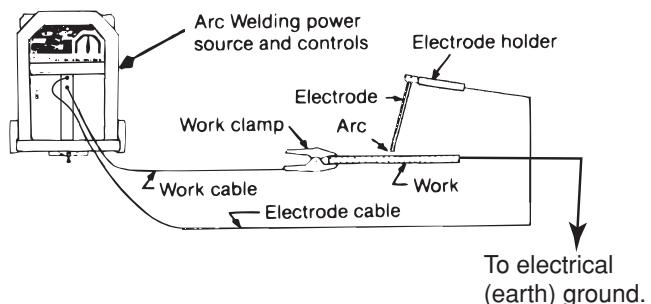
The welding circuit for Shielded Metal Arc Welding(SMAW).
